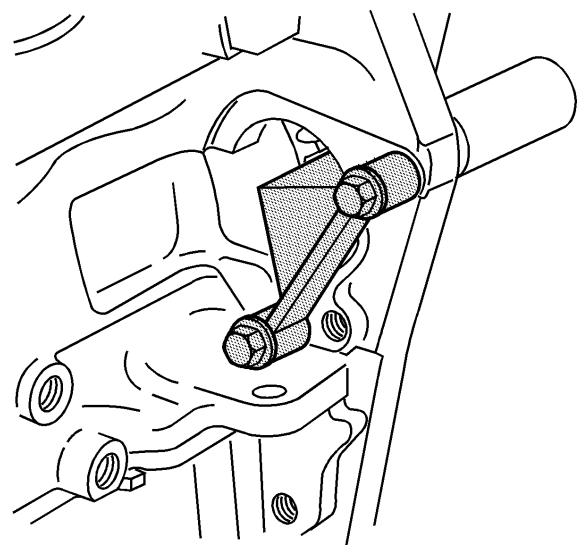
Identifying Special Tool - EN 46106 Courtesy of GENERAL MOTORS COMPANY
